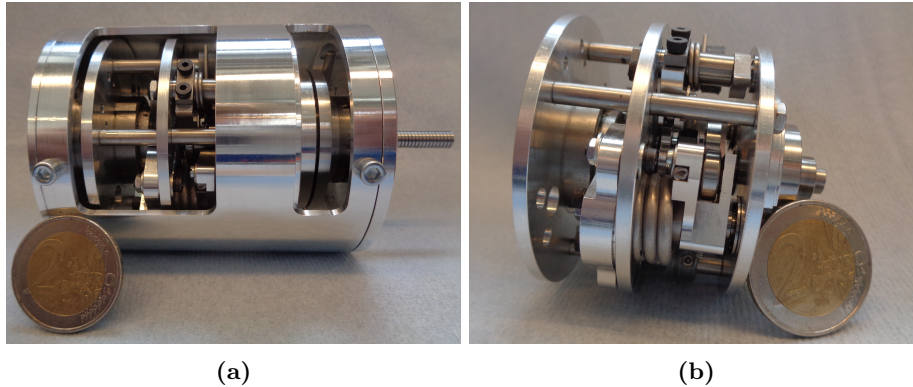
Realized Prototype with coin for scale. a: Picture of assembled drive.
